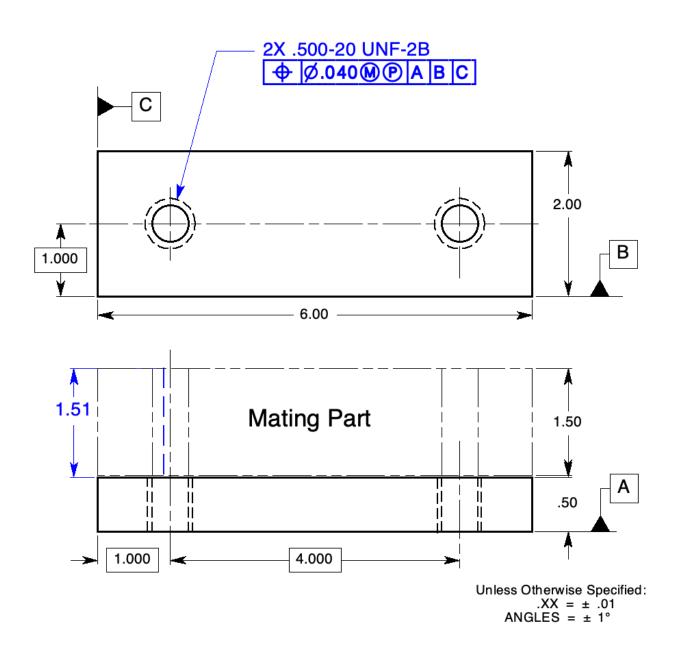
Projected tolerance zone: Prob. 11.
